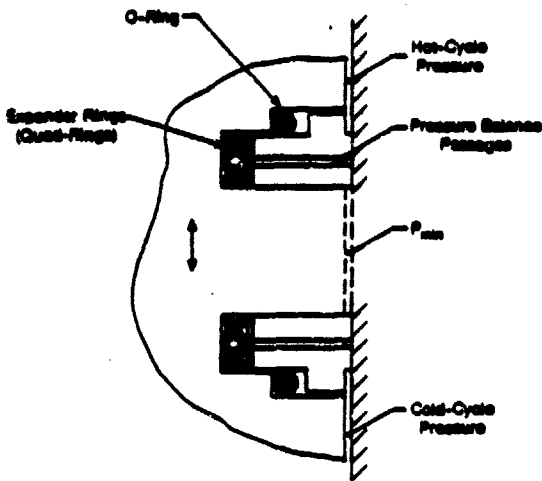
L-Shaped H-Rings (O-Ring Retention - Two Rings/Piston)
